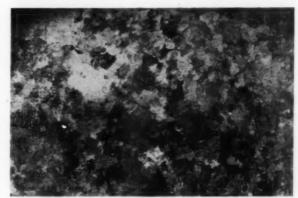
Photomacrograph at 1.8x of machined and etched high purity nickel casting. Large grain size of the nickel shown. Horizontal striations were made by machining tool.
